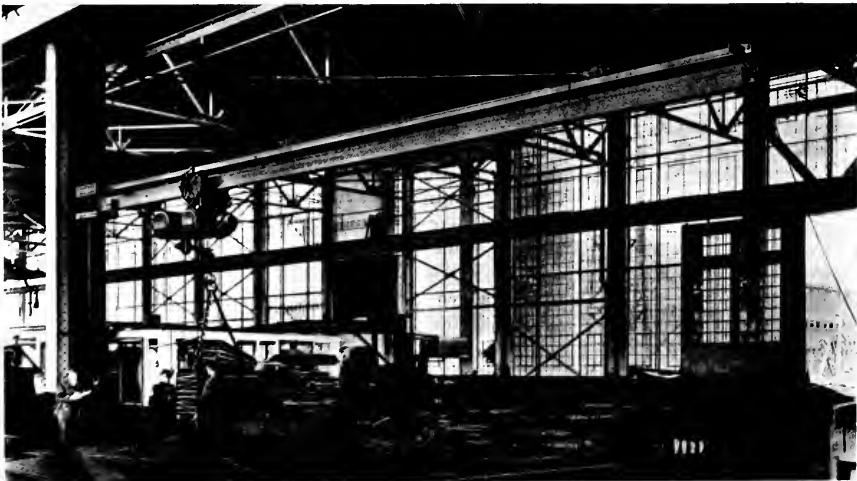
View of a 5-ton, 2-motor jib crane, directly over a load deposited on one of the electric trucks. All of the material fabricated in this building passes through the open door shown in this picture.
